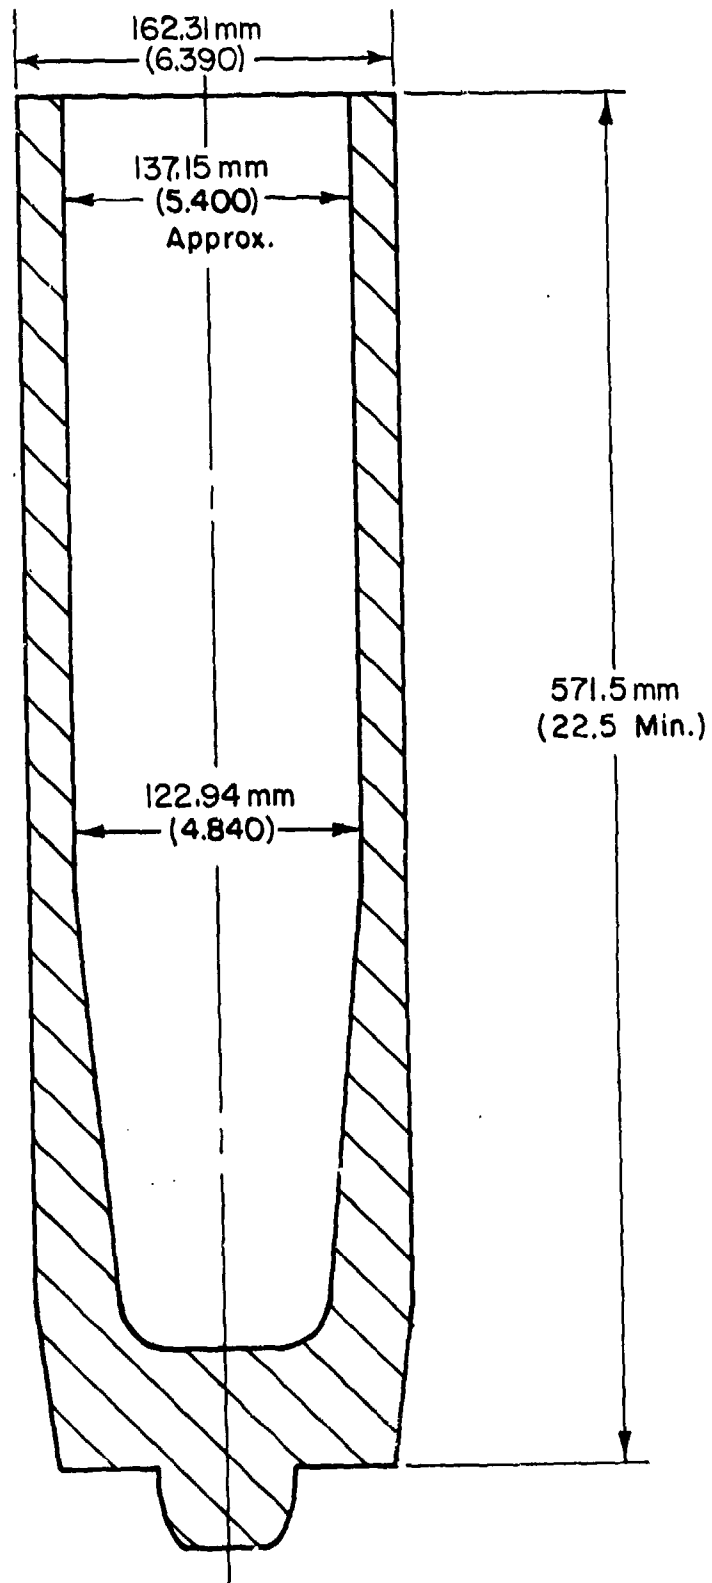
(b). Body of 155 mm M107 shell after the hot drawing.
